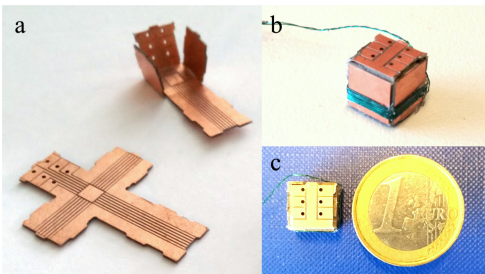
a) Receiver cross-shape PCB. b) PCB housing the stimulation electronics folded into a box of 1 cm^3 . The receiver coil is wrapped around the box. c) The receiver module size as compared to a one Euro coin.
